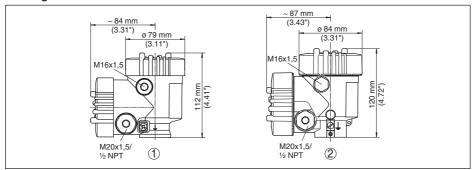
Dimensions housing (with integrated display and adjustment module the housing is 9 mm/0.35 in higher, with metal housings 18 mm/0.71 in)
